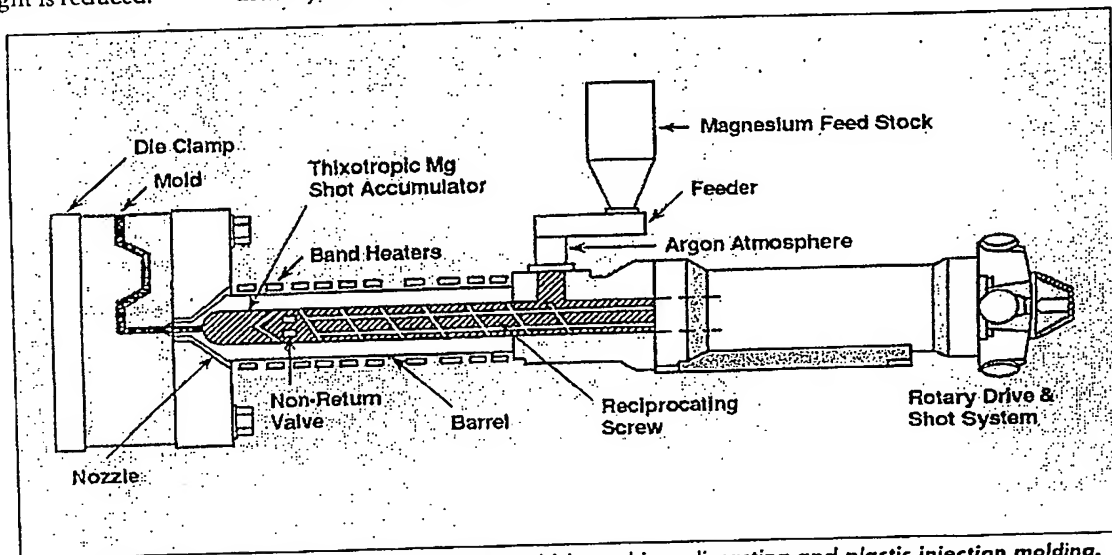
Pictured is a schematic of a thixomolder, which combines diecasting and plastic injection molding.
